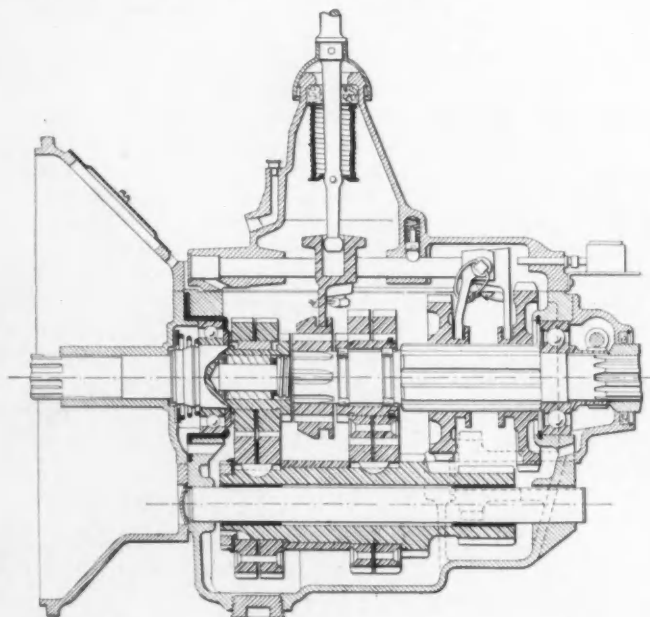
PIERCE-ARROW FOUR-SPEED GEARSET
